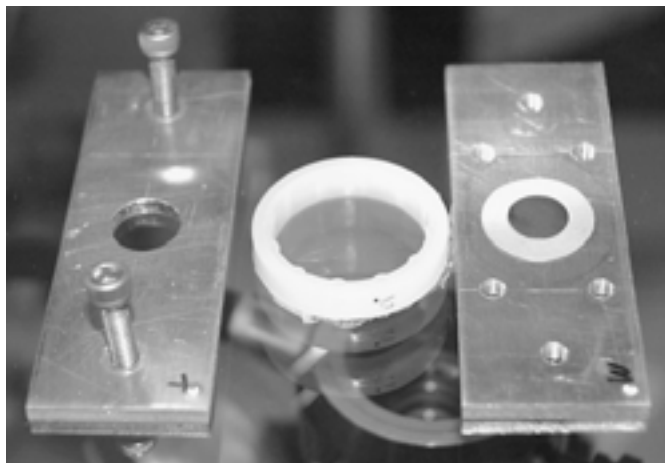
Photograph of physical fixture diagrammed in figure 1.
